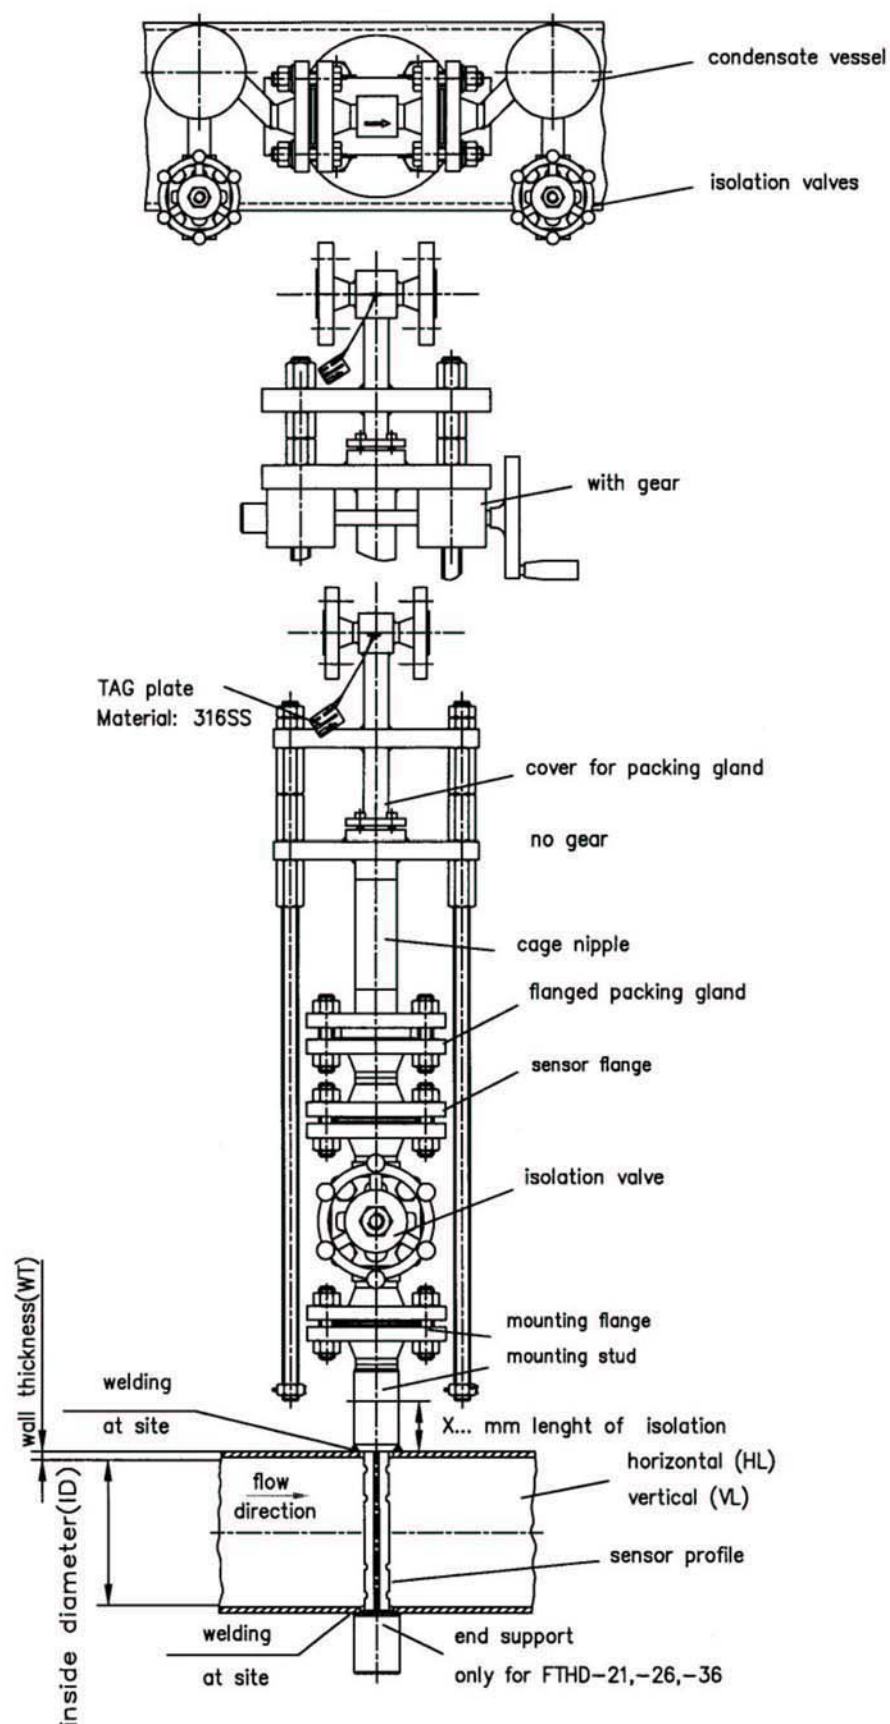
Pitot tube sensor FTHD-36 made of st. steel for a pipe with ID = 336.5 mm
